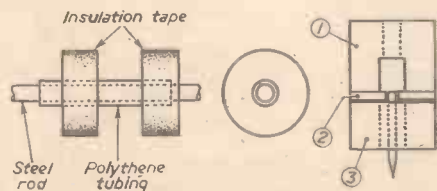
The temporary coil former, and Fig. 3, the assembled cartridge.
